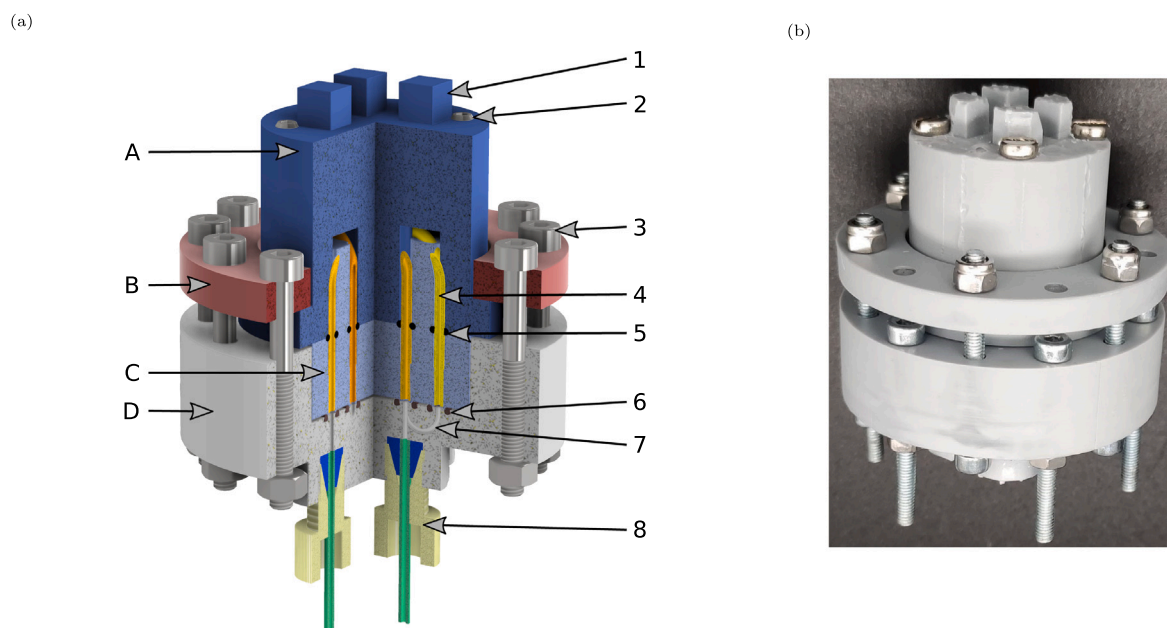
(a) Section view of the assembled valve system CAD: A – Rotor part 2 (dark blue); B – cover (red); C – rotor part 1 (light blue); D – stator (gray); 1 – adapter for motor coupling; 2 – screw for joining the two rotor parts; 3 – screw for axial compression of rotor and stator; 4 – capillary chromatography column (different shades of yellow/orange indicate the three different visible columns); 5 – O-ring to prevent fluid bypass around the columns; 6 – O-rings sealing the rotor-stator interface; 7 – connection channels in the stator; 8 – fluidic connection (in/outlet) to the stator. (b) Assembled 3D-printed valve system. (For interpretation of the references to color in this figure legend, the reader is referred to the web version of this article.)
